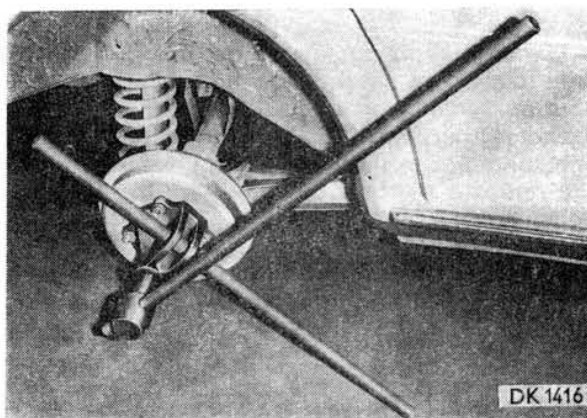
/1 - Pulling off Wheel Hub Using MP 5-111, MP 5-152 or MP 5-153 (recent version) Jig
